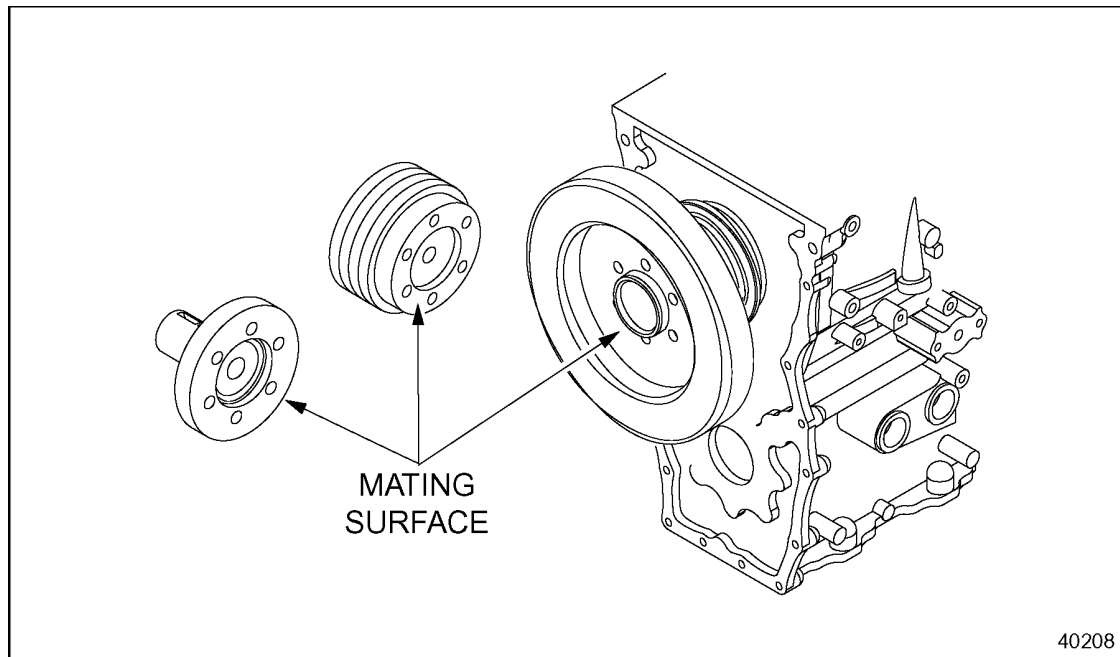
Crankshaft Pulley (or Spindle) and Vibration Damper Inspection
